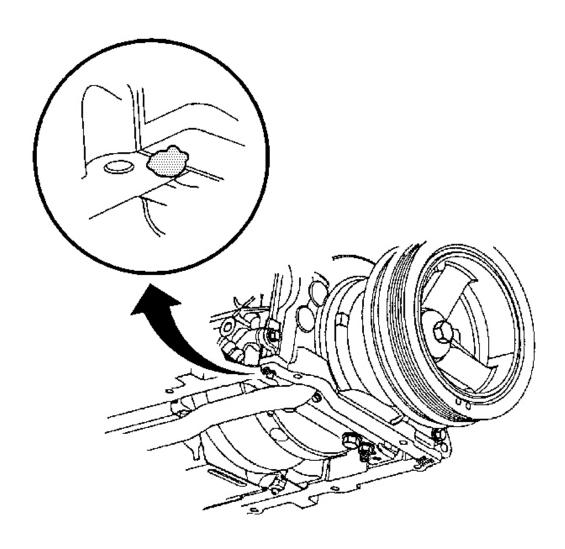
View Of Sealant Applied To Front Oil Pan-To-Engine Block Junction Courtesy of GENERAL MOTORS CORP.
